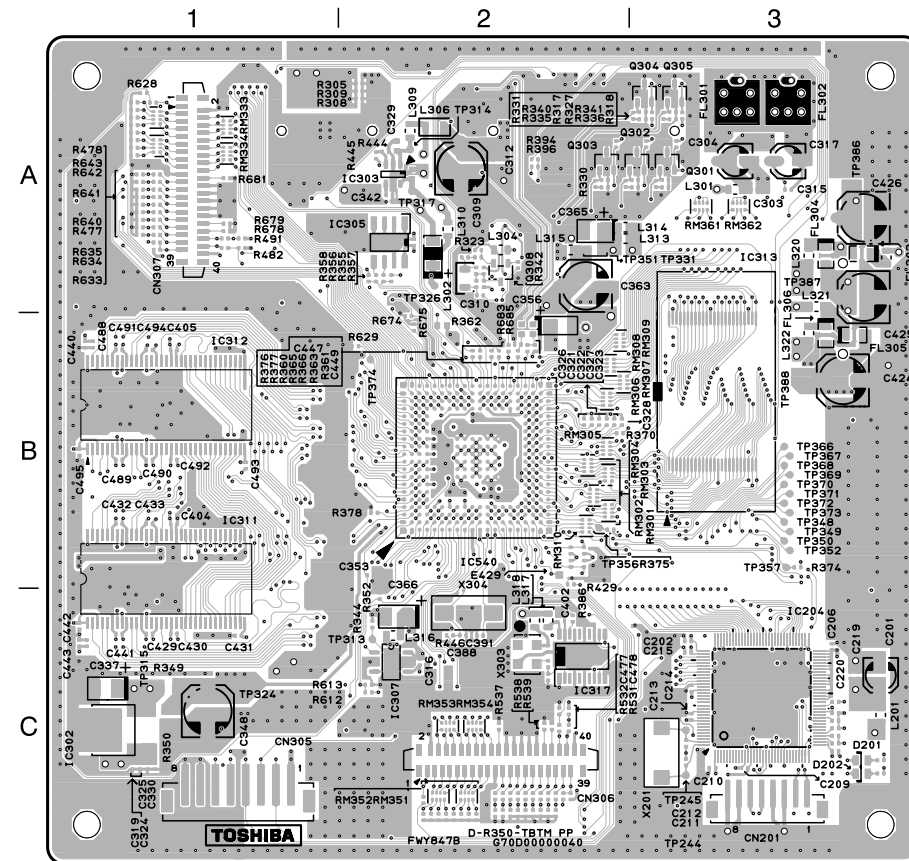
EU01 Digital PC Board (Top side)
